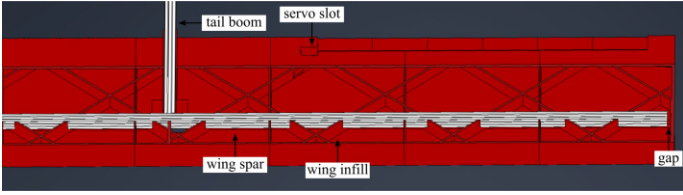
Cross-sectional view of the wing showing the extruded aluminum wing spar, thin-walled printed shell, and internal lattice structure used.
